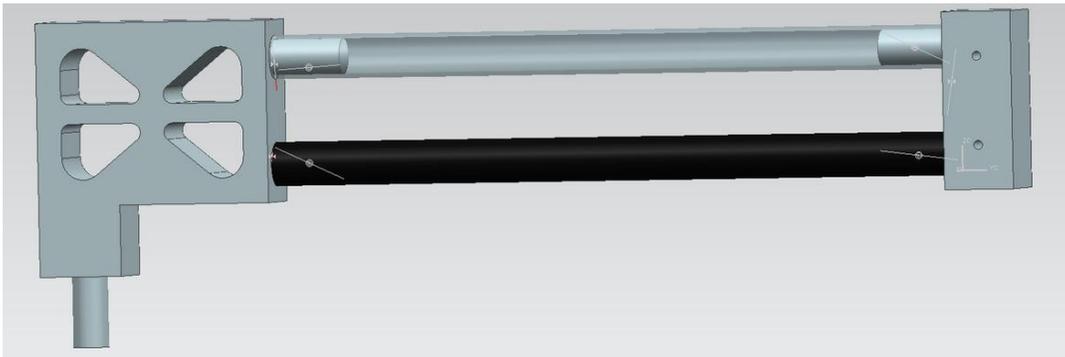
First CAD model of a design concept. This is very oversized and heavy, and would require machining on many faces and waste a significant amount of material.
